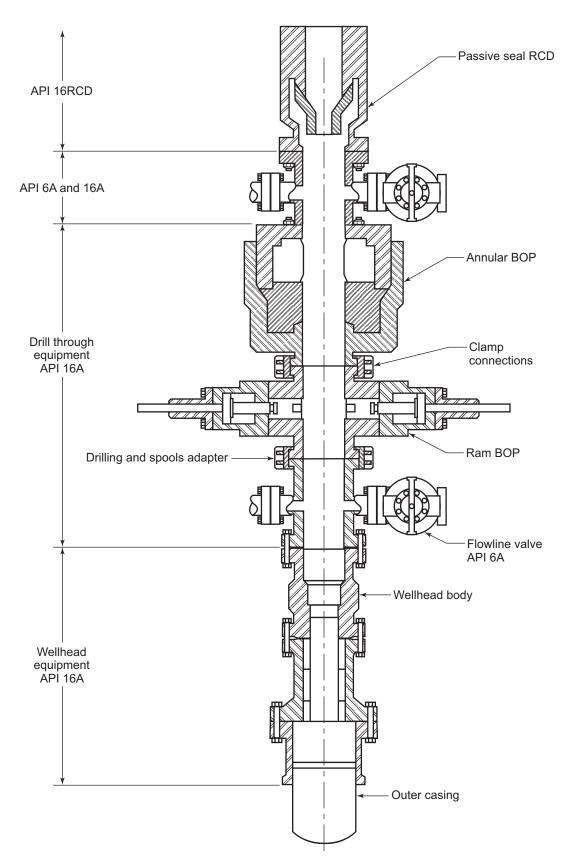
Typical Surface Stack illustrating a Passive Rotating Control Device
